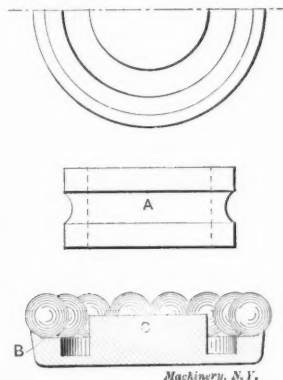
Inner Race and Section through One-half the Cup used in Assembling the R. B. F. Radial Bearing
